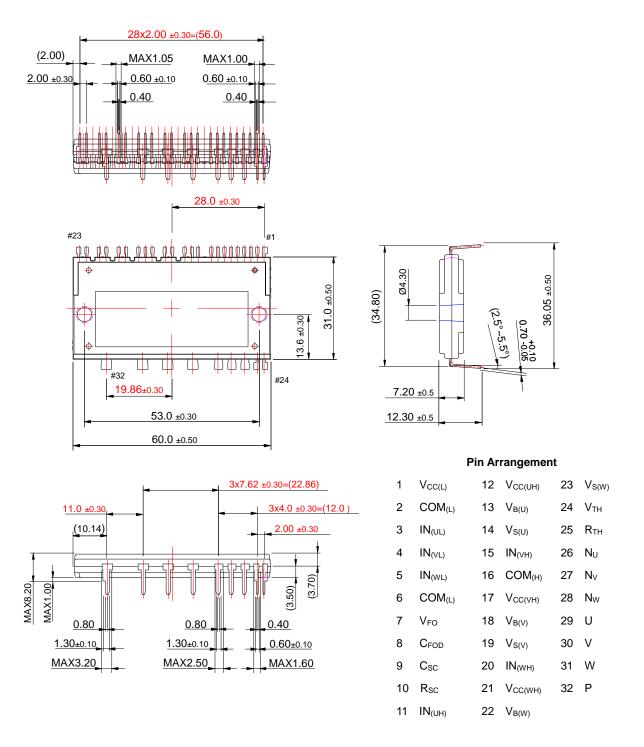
Package Outline Dimensions (SPM32-CA)
